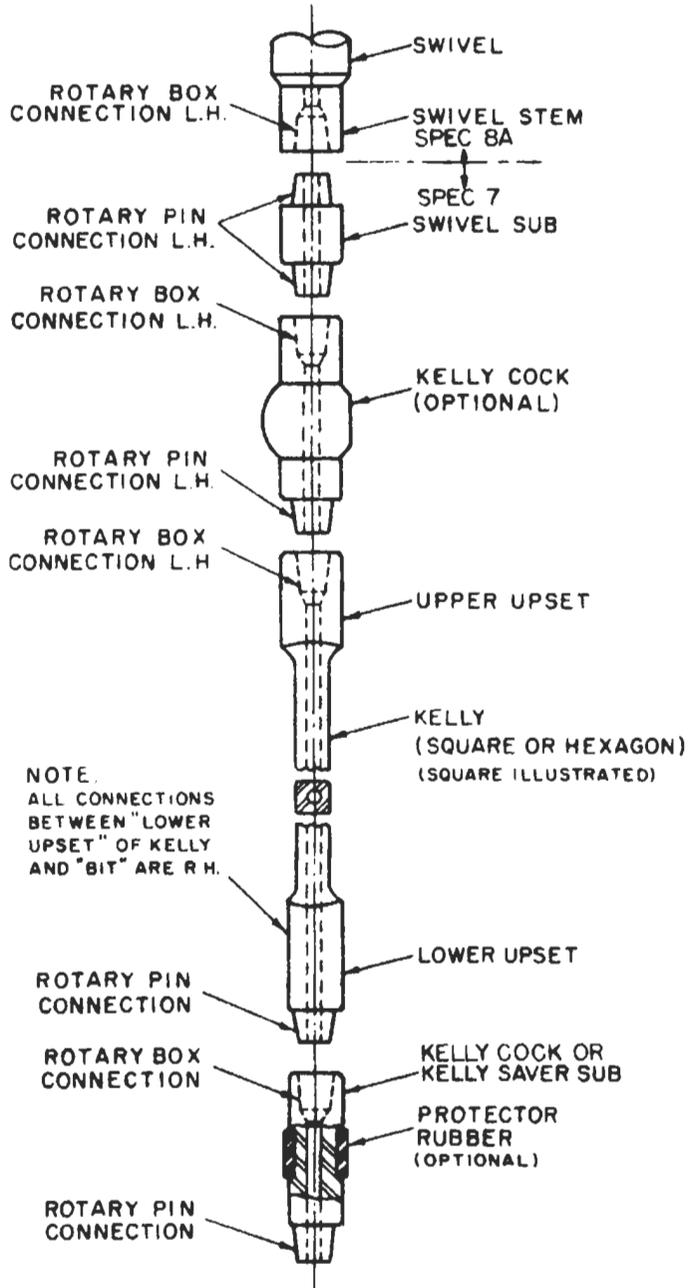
Rotary equipment—surface elements of drill string [13].
